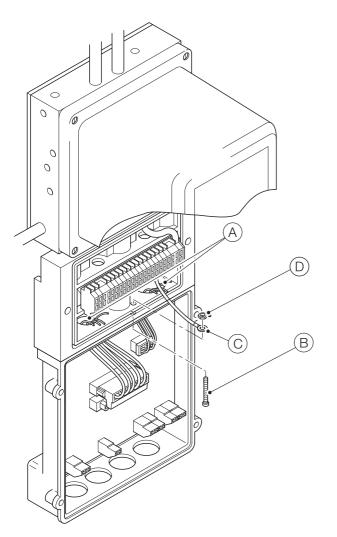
Re-fitting the terminal ring and attaching the Smart Electronics assembly to the SMA90 terminal moulding
